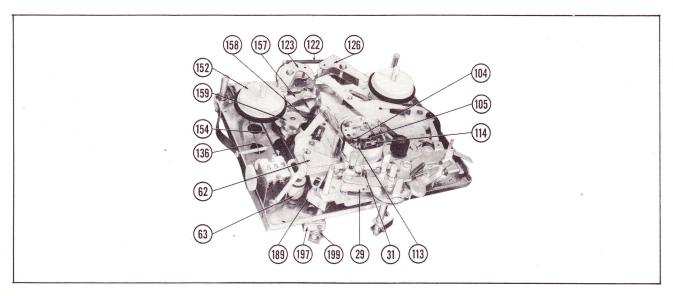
Exposed View of Transport Mechanism With Amplifier Chassis Removed
